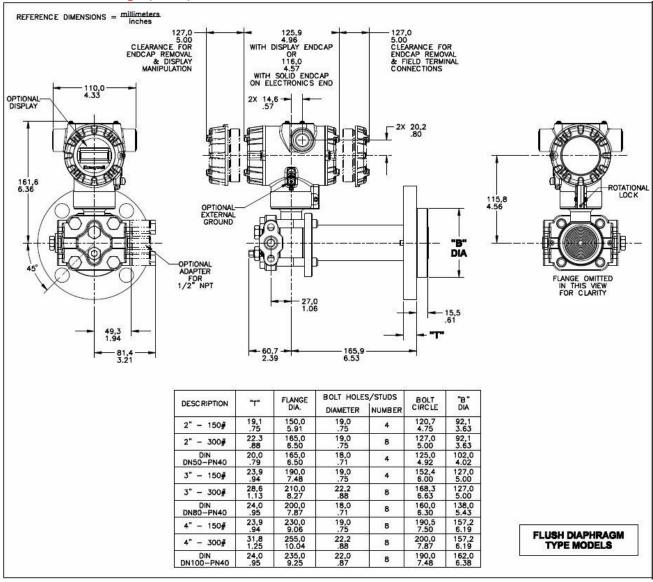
Typical mounting dimensions for flush diaphragm type models STF728 and STF732.
